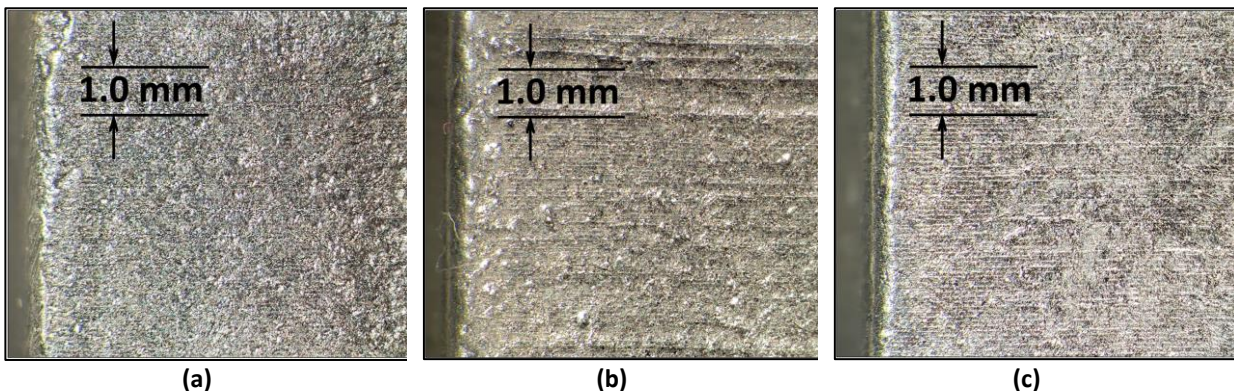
Cast surfaces of A319 alloy, 700 °C burnout: (a) ABS pattern; (b) PLA pattern; (c) PVB pattern [7].
